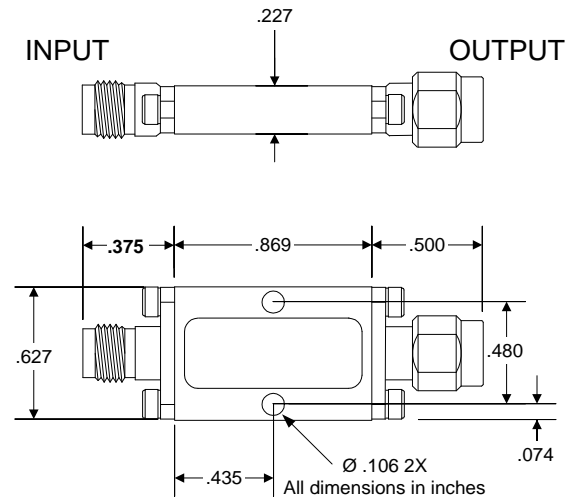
Coaxial package mechanical dimensions. Input and output are labeled on the coaxial package.
